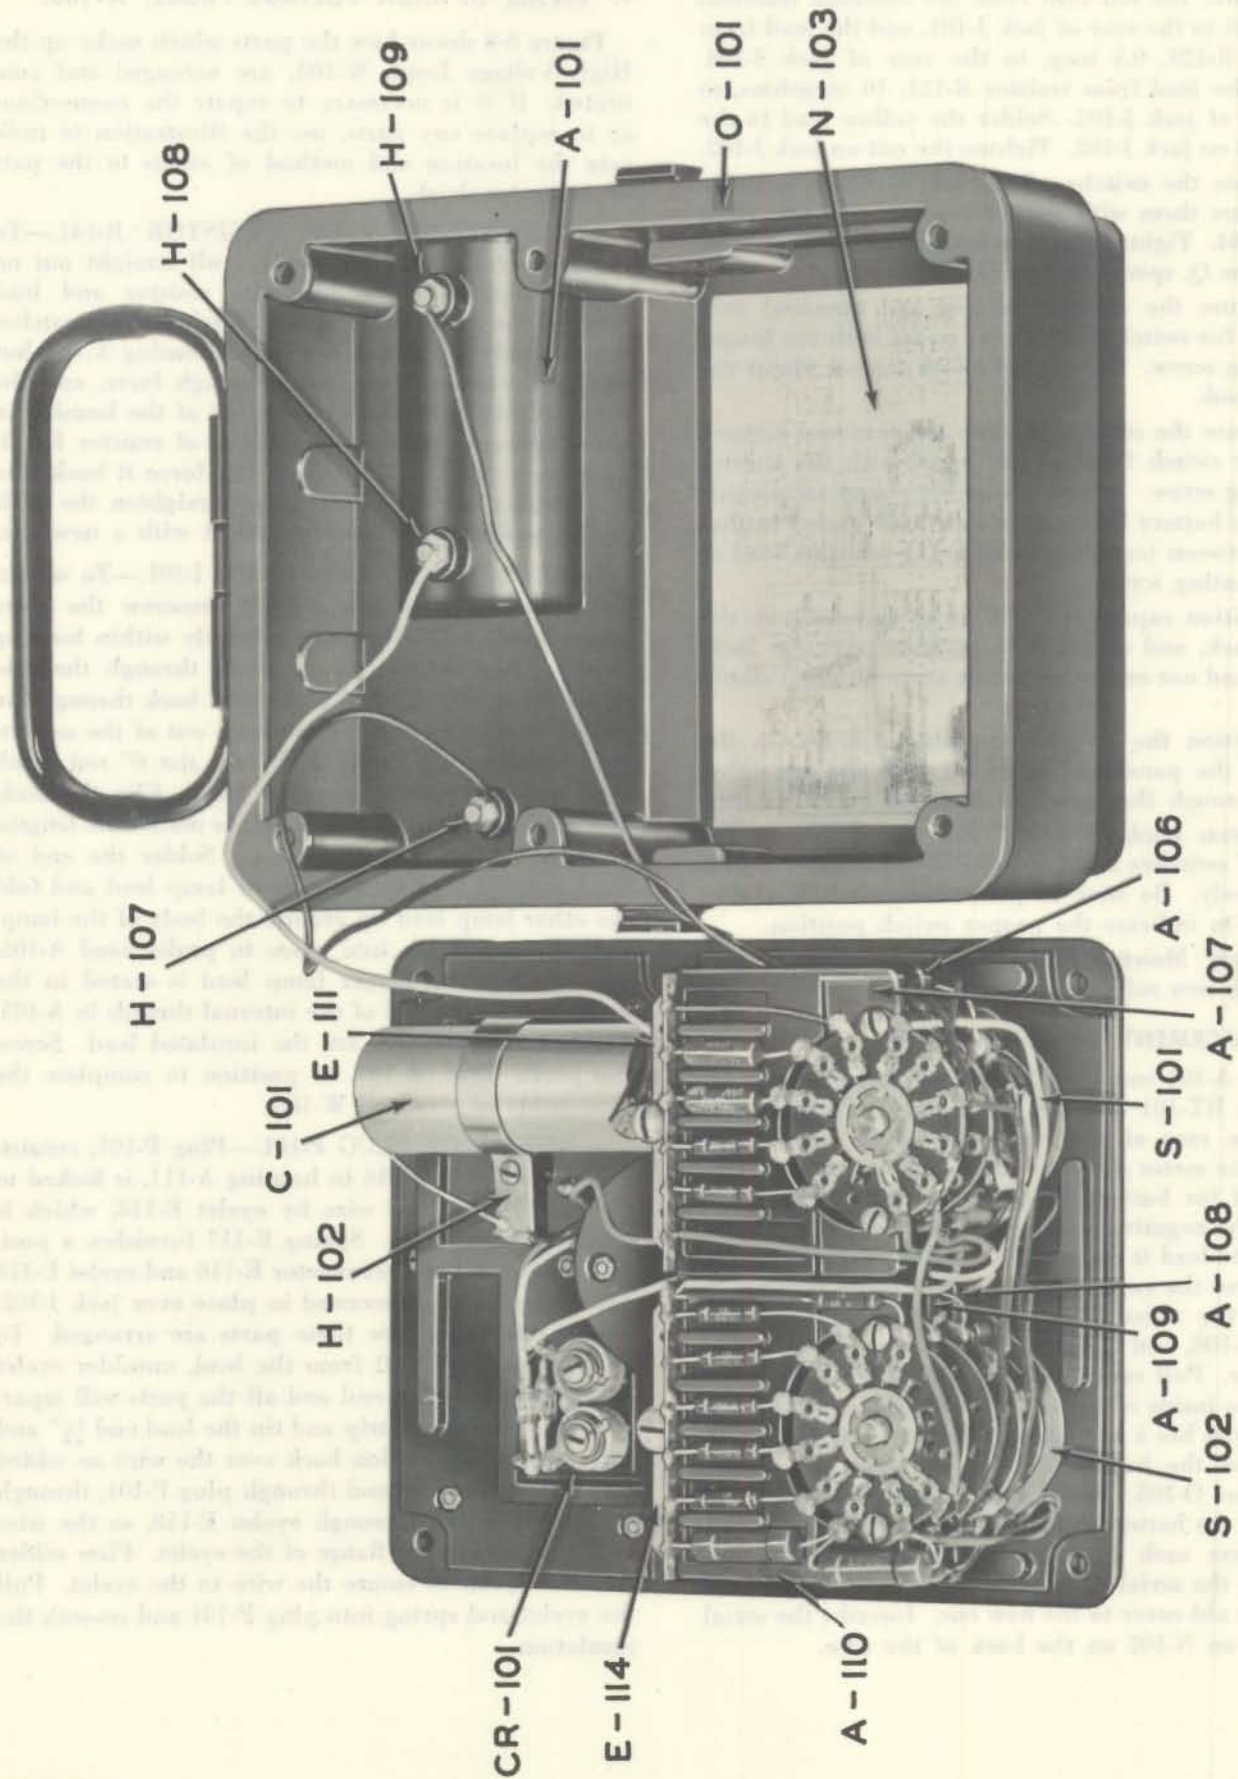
Multimeter ME-48A/U, Rear View with Case A-101 Removed.
